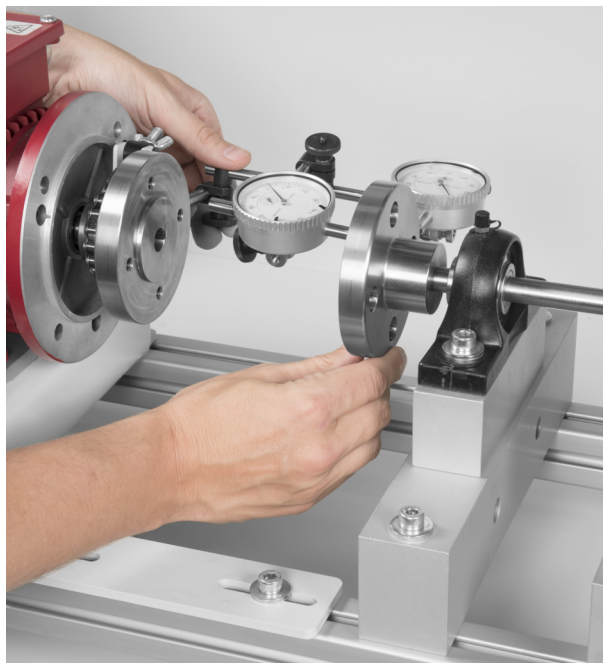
Measuring the horizontal misalignment using the rim and face method.
